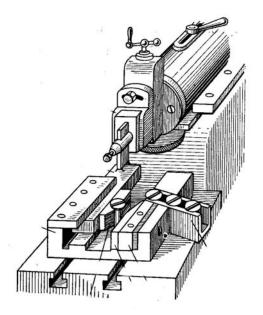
Thread rolling attachment used in shaping machine.
